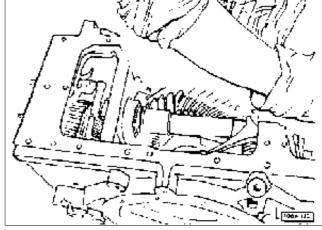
Push the drive shaft into the speed reduction assembly, aligning the parts so that the shaft is correctly positioned.
